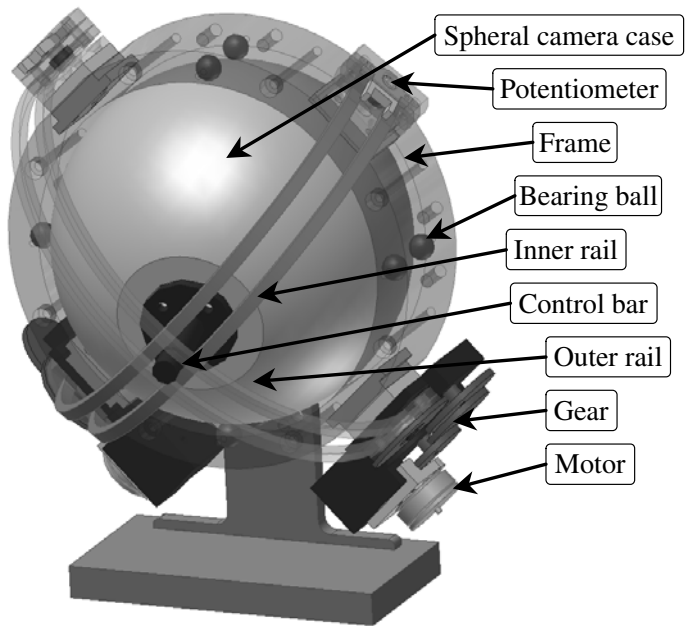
3D CAD sketch of robot vision system (Back view)
